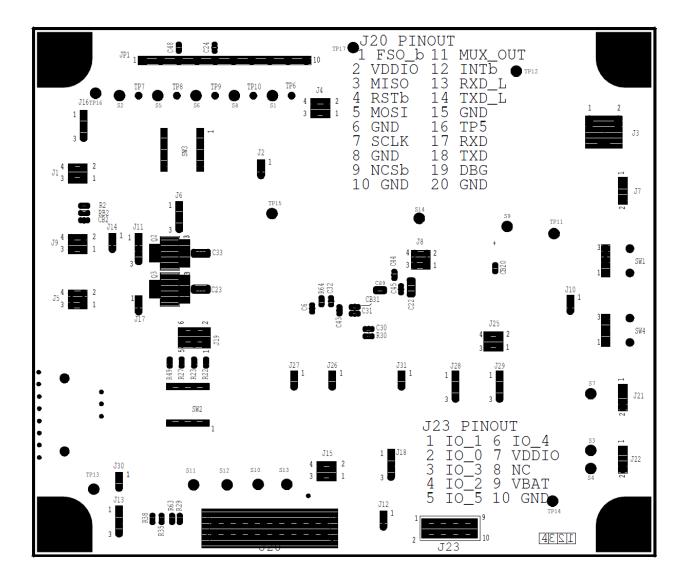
KIT34FS6407EVB/KIT34FS6408EVB Assembly Layer Top
